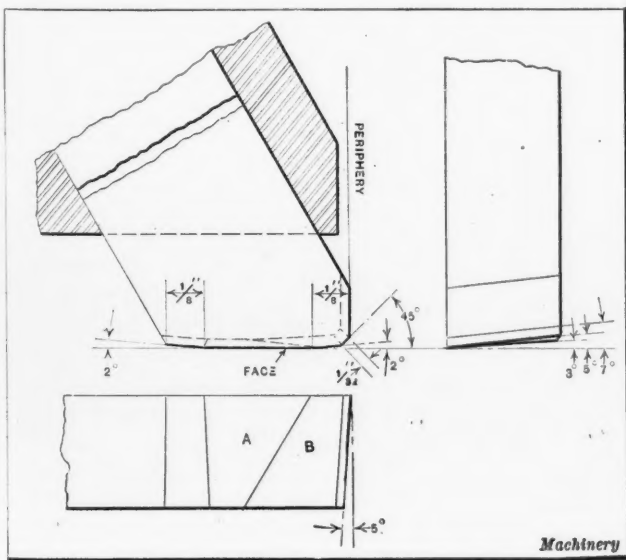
Shape of Stellite Blade when the Machine Spindle is inclined 1 Degree
